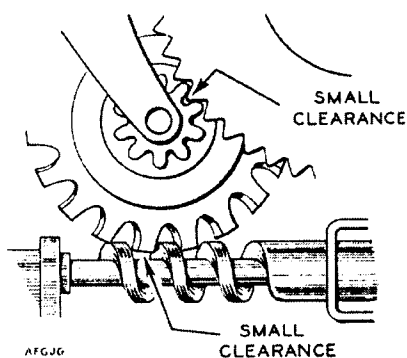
SETTING OF THE GOVERNOR GEAR
